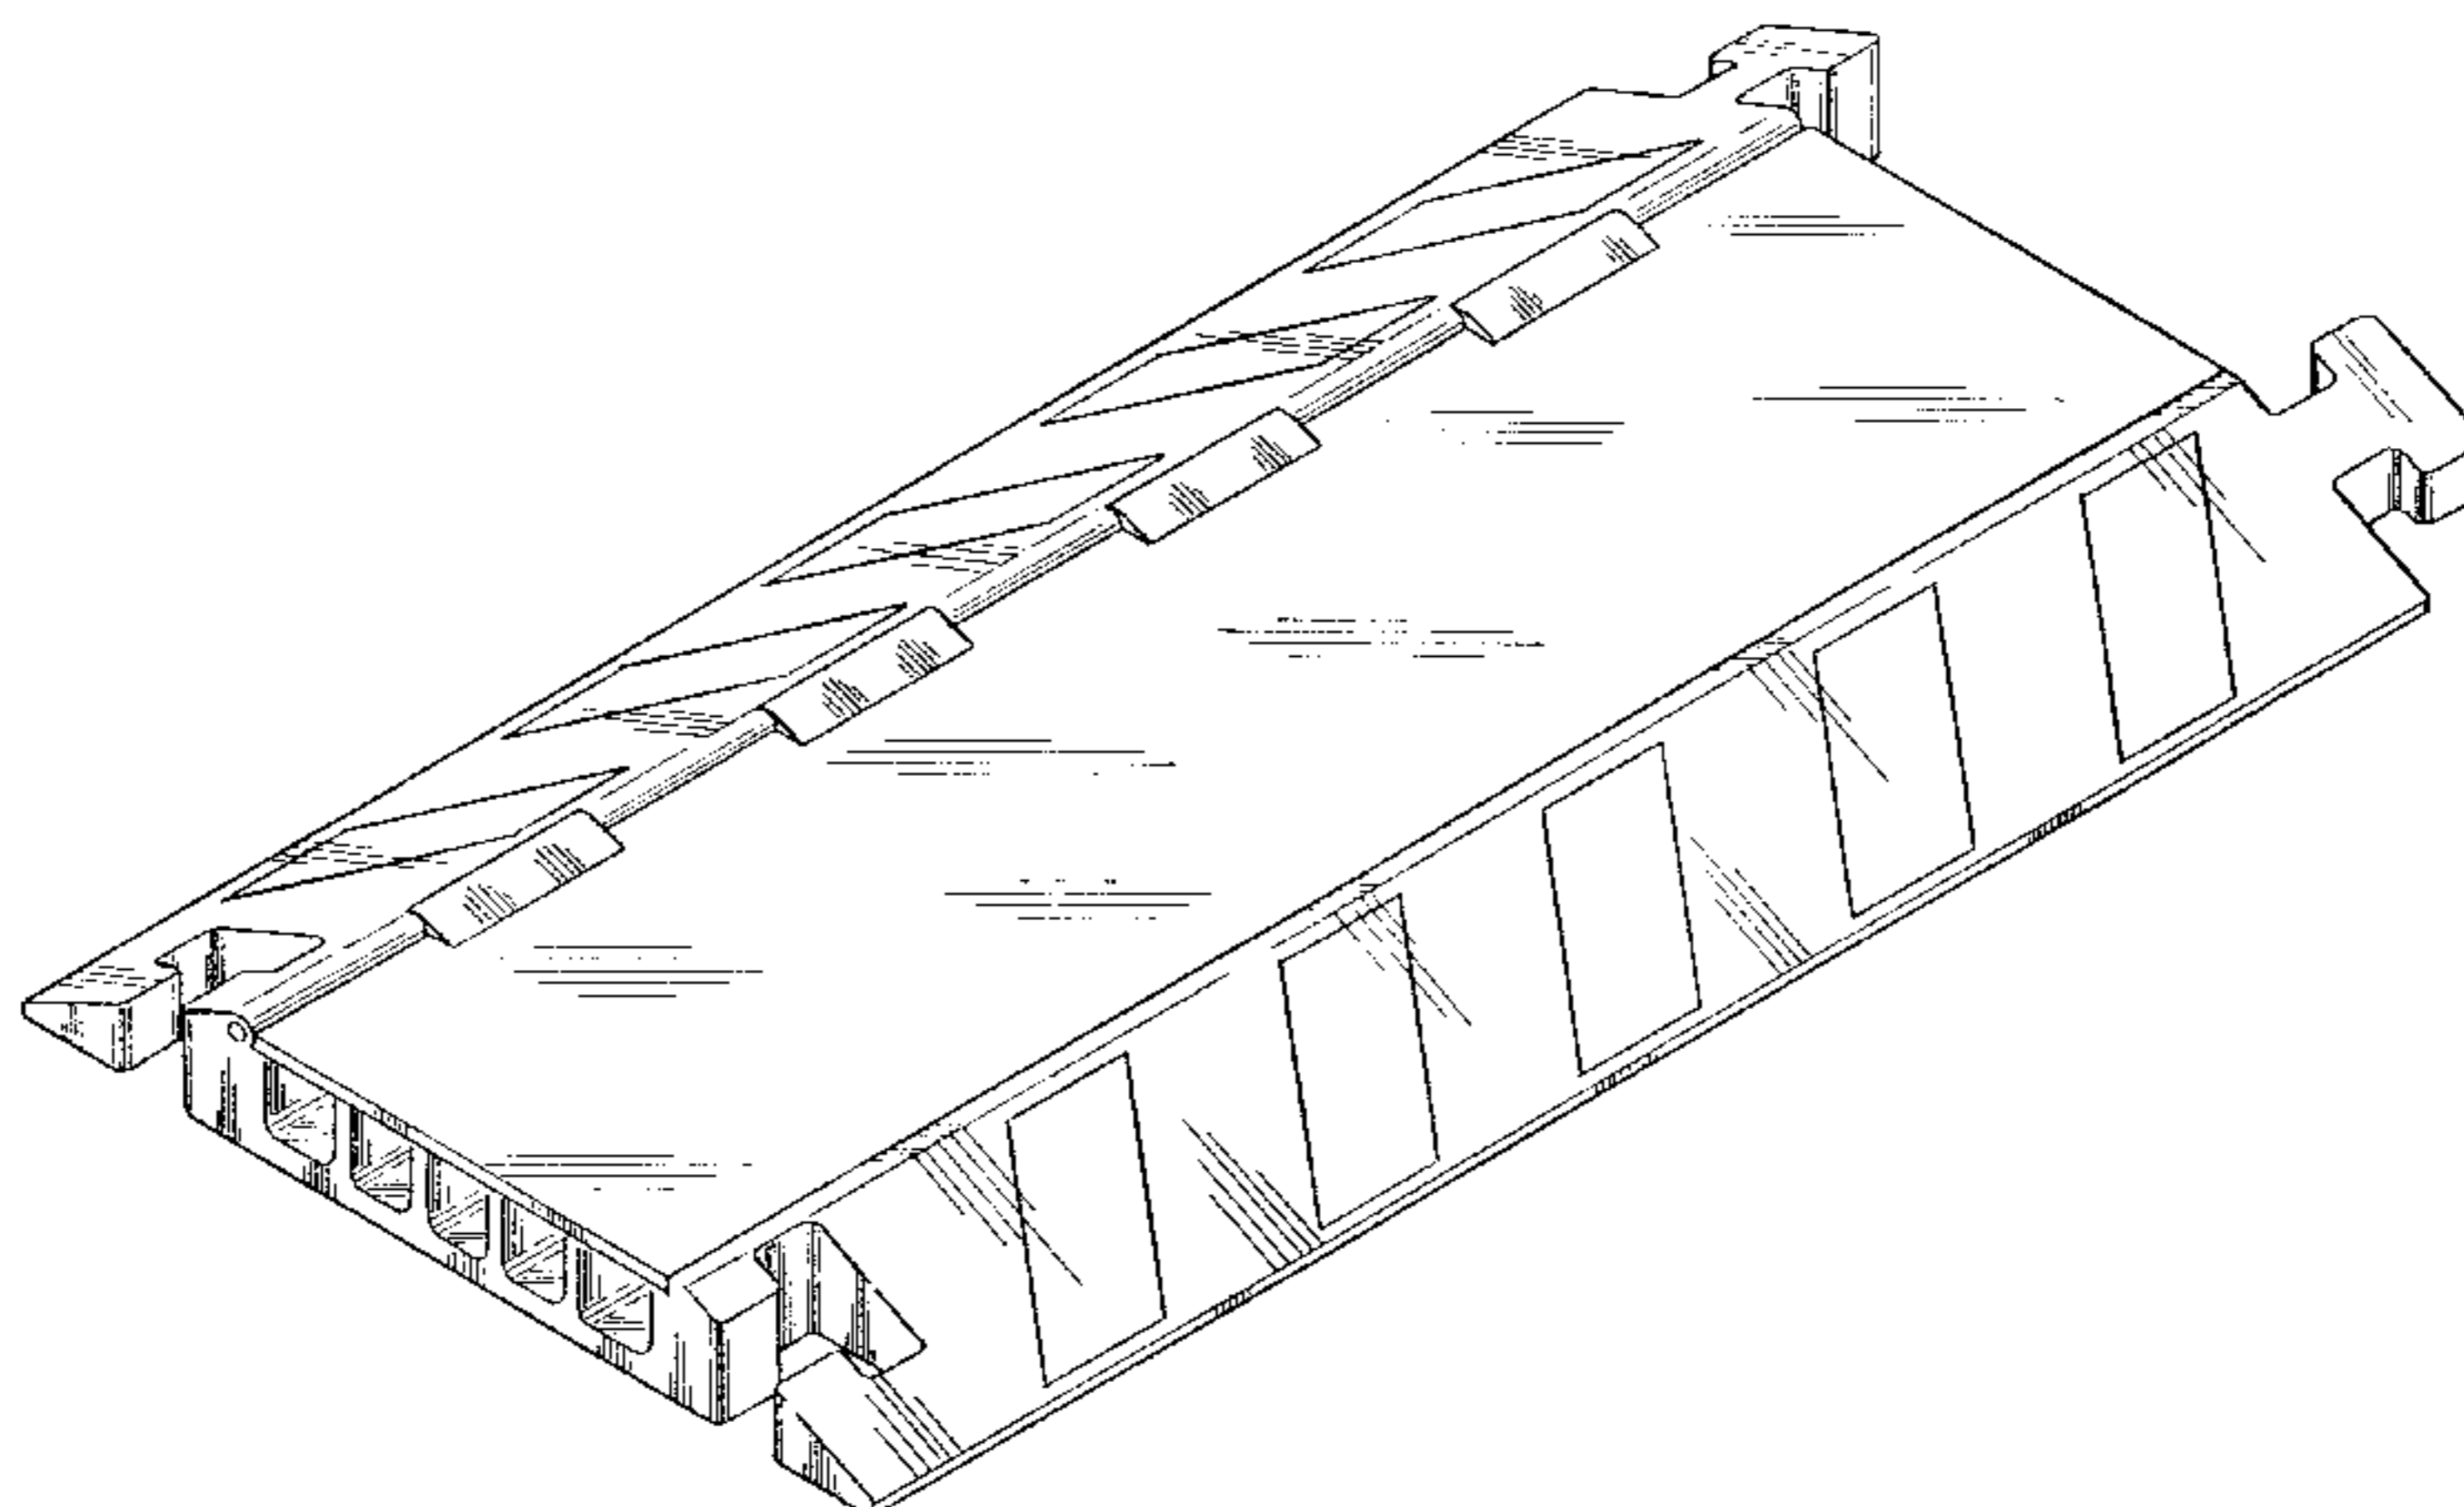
is a front perspective view of another alternative embodiment of a modular cable protector showing my new design, with the bottom view, left side elevational view, and right side elevational view being the same as shown in FIGS. 4–6, respectively.
